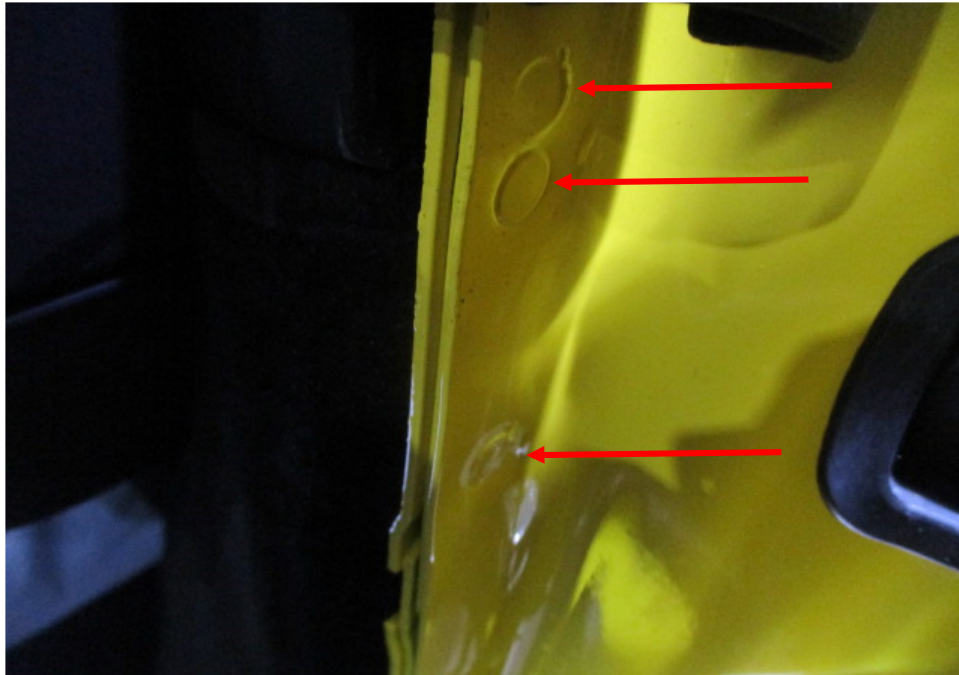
shows the aluminium chassis/structural body at the underside front right of the Motor Car. I did not find any weld marks other than original spot weld marks on the aluminium chassis/structural body of the Motor Car. The original factory sealant (arrowed) at the joints along the aluminium chassis/structural body was untouched, indicating no work was done on the aluminium chassis/structural body of the Motor Car and that the aluminium chassis/structural body was originally fitted.
